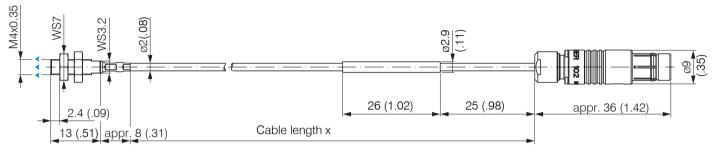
Dimensional drawing sensors ES-S04-CAx/mB0, dimensions in mm (inches)
